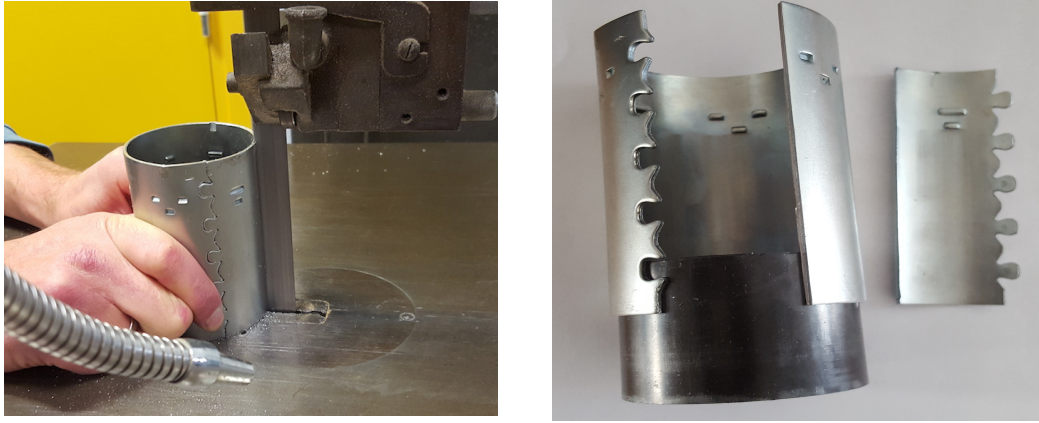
Extraction of magnet by cutting rotor back for a Halbach rotor sample
